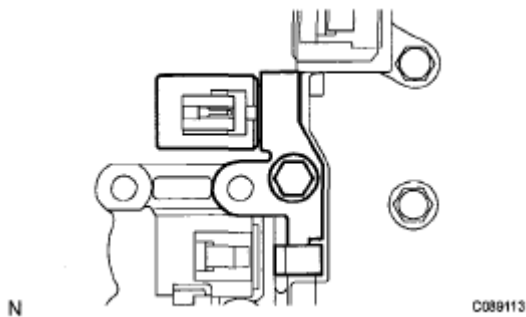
Identifying Shift Solenoid Valve SL2 Bolt
